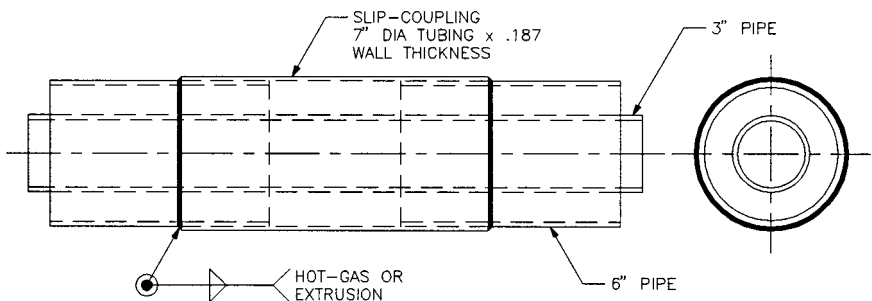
Cross-sectional view of an assembled slip-coupling.
